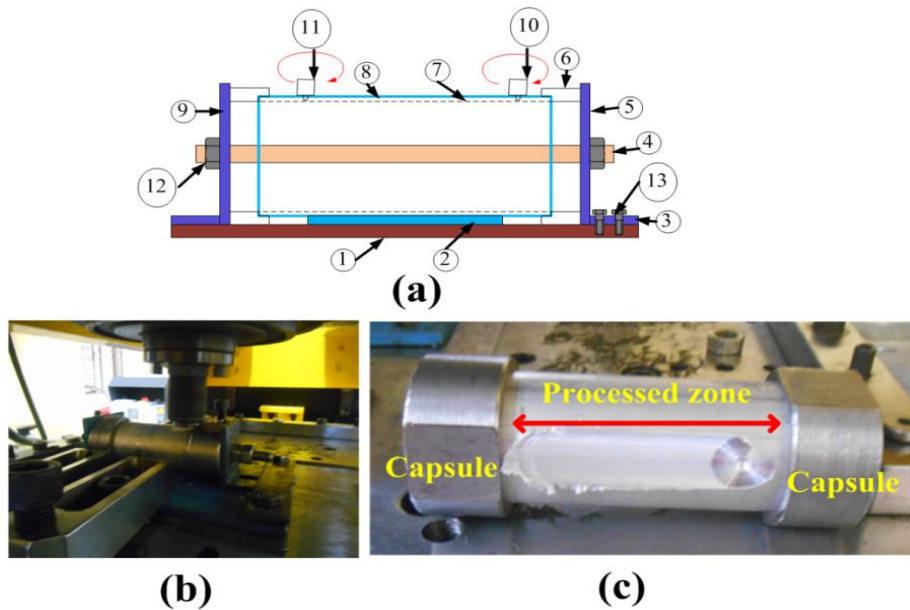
FSP of tubes, (a) schematic of processing set-up for FSP of tubes, parts (1: base plate, 2: support plate, 3: slot, 4: inside rod, 5: movable angle plate, 6: capsule, 7: mandrel, 8: tube, 9: fixed angle plate, 10: FSP starts, 11: FSP ends, 12 and 13: bolts), (b) actual experimental set-up showing the processing operation, and (c) final FSPed tube
